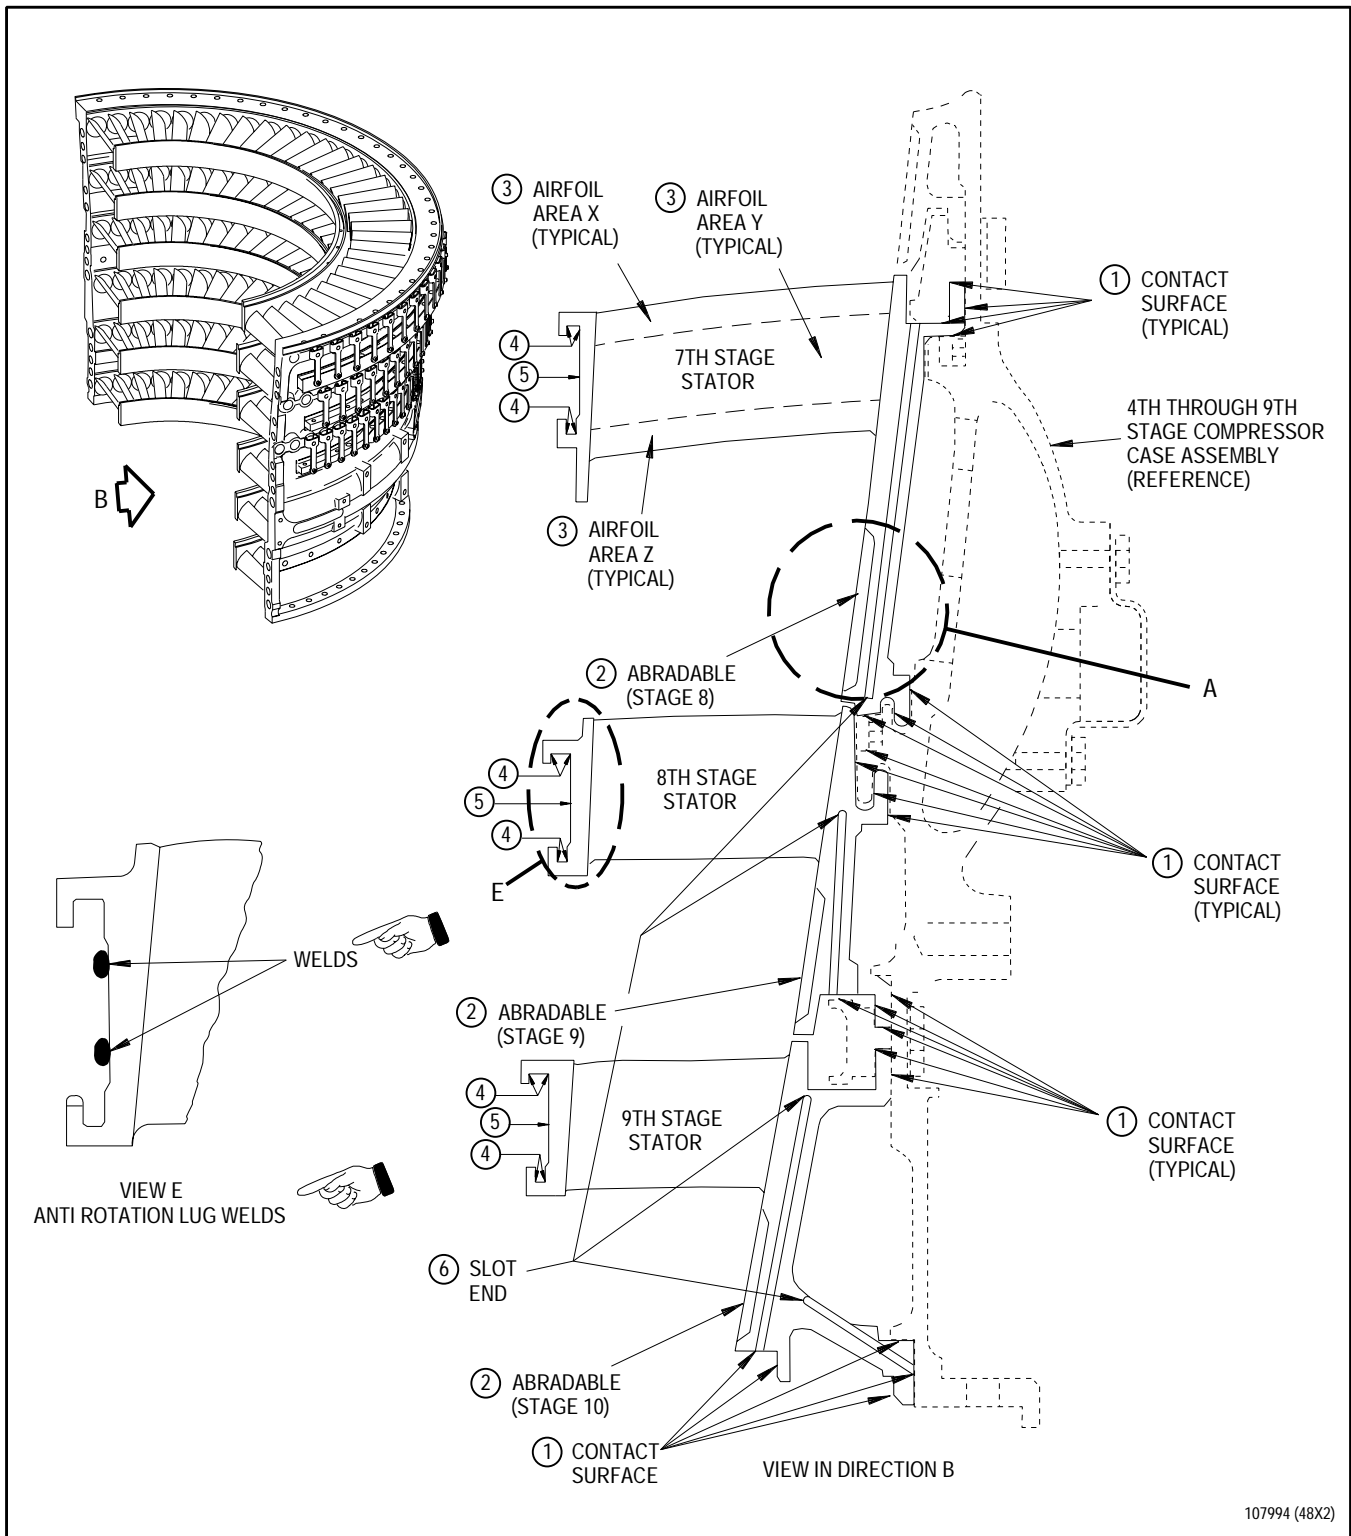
Seventh Through Ninth Stage Compressor Stator Segment Assemblies - Inspection (Sheet 1 of 2)
